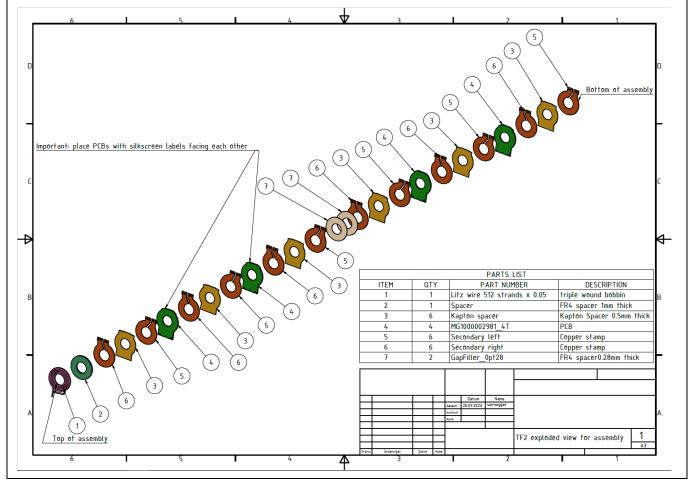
Mechanical drawing of LLC main transformer winding arrangement
